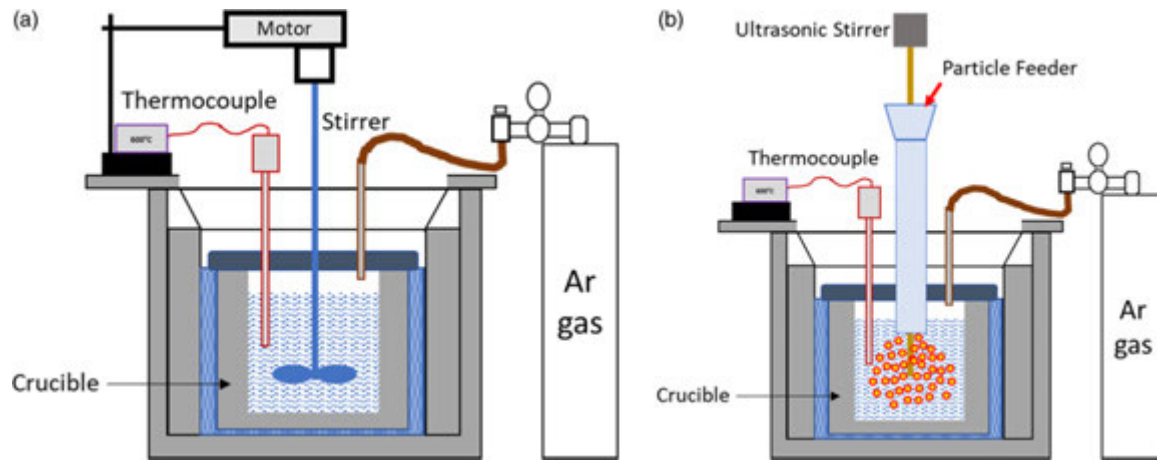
Schematic of (a) mechanical stir casting and (b) ultrasonic stir casting.
